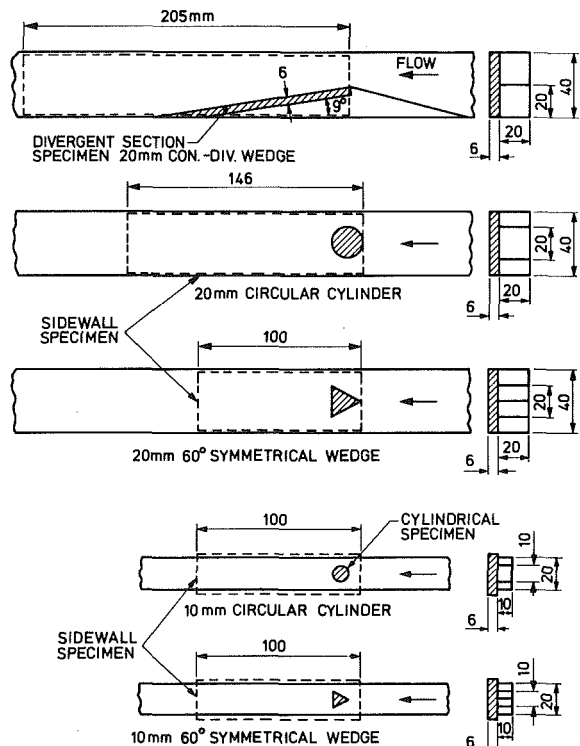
Erosion test specimens and their position in the working section. (All dimensions in mm).
